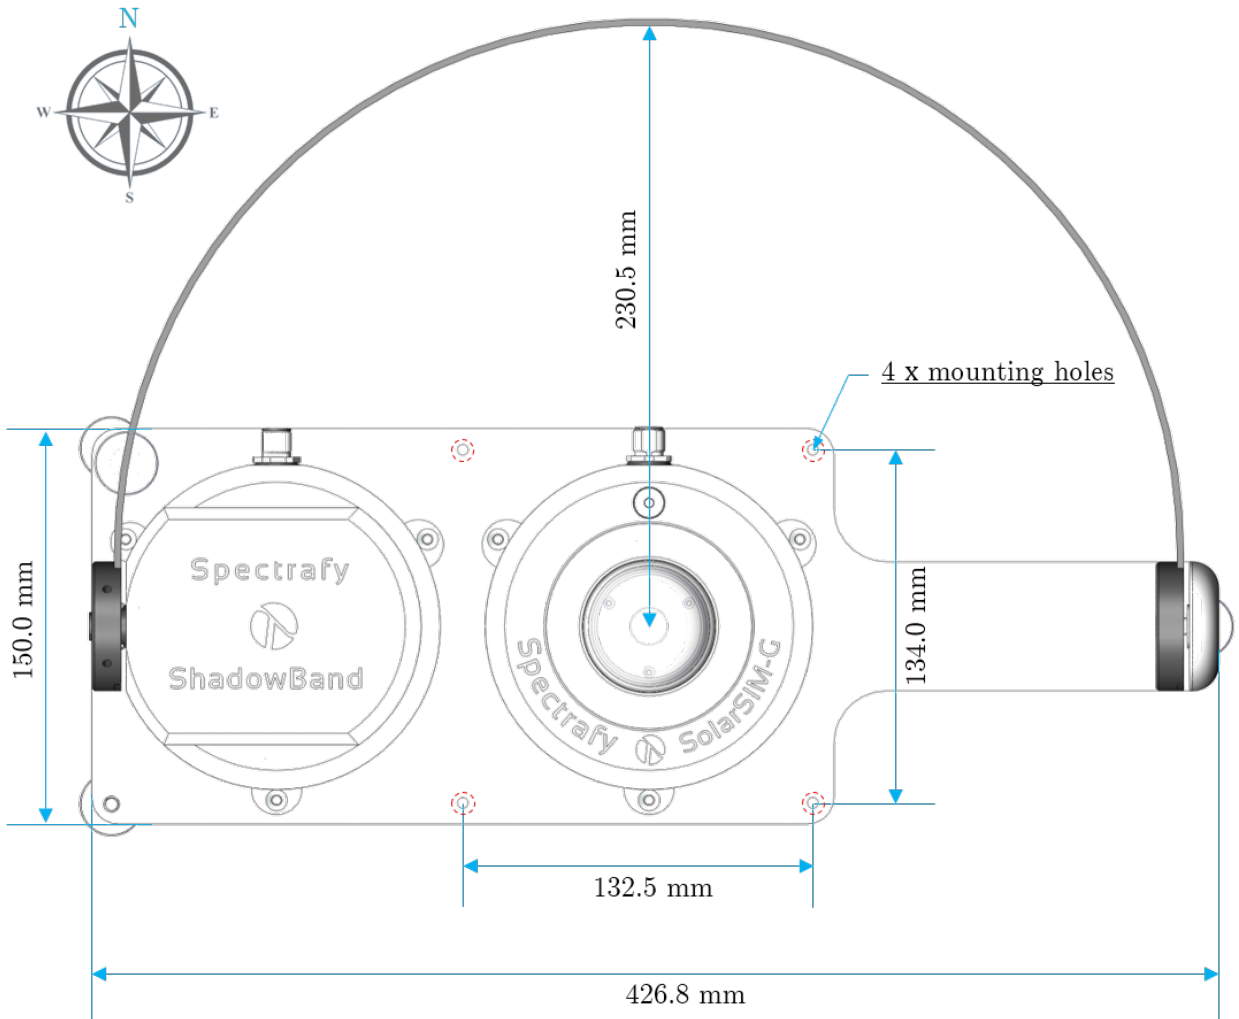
Main dimensions of the SolarSIM-E on a mounting plate. Four mounting holes, highlighted in red-dotted circles, secure the device to a test platform or a table. Note the SolarSIM-G connector should point due North.
